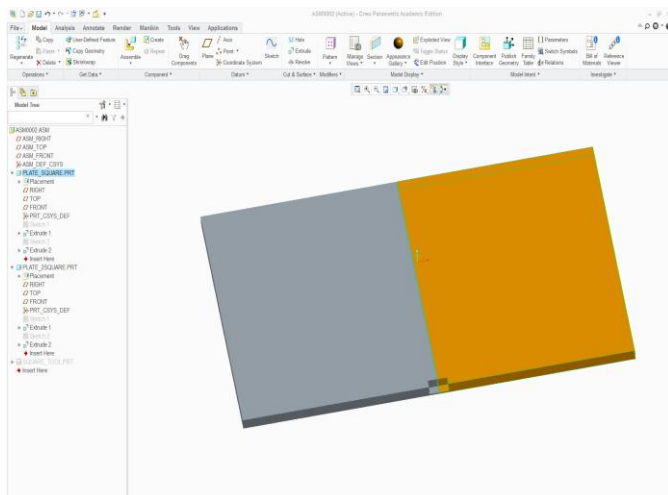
3D Modeling of plates to be welded (Al and Cu).
